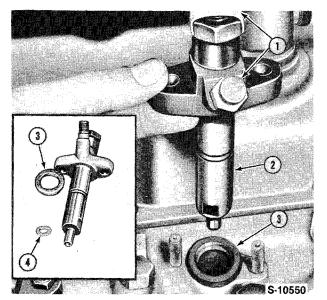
Fuel Injector Removed 1. Dust Caps 3. Dust Seal Washer
